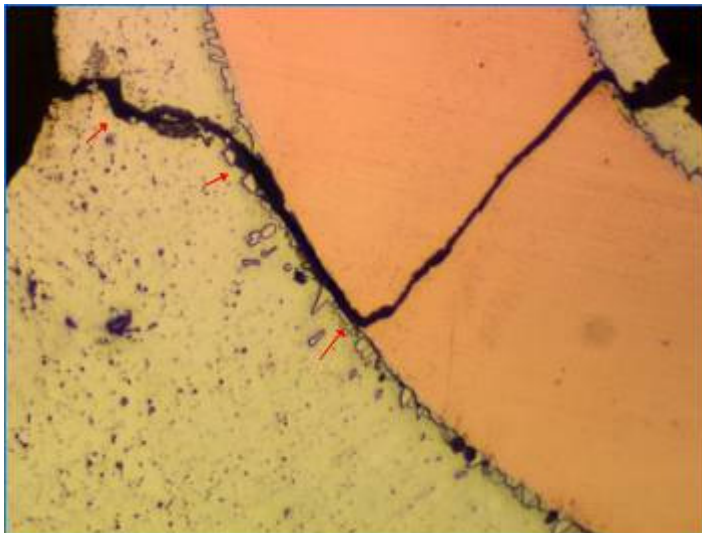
cross section, SN65, U20, right lead and solder crack, 400x
